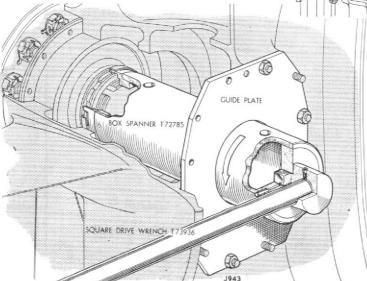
Removing the impeller pivot nut, using box spanner T.72785, guide plate T.74791 (48 Mk. 1) or T.77451 (48 Mk. 2), and square drive wrench T.73936,
